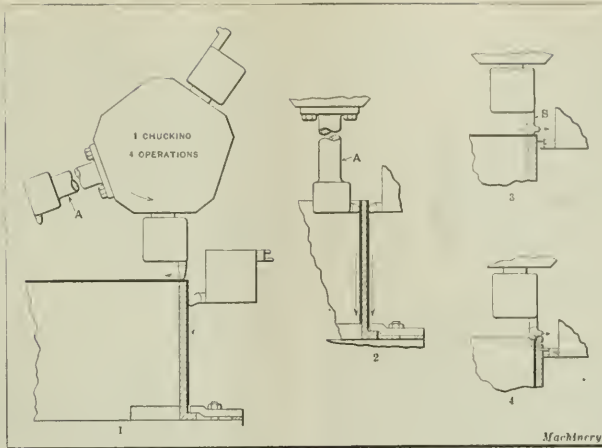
Sequence of Operations and Tooling Arrangement for producing Piston-rings from a Pot Casting
